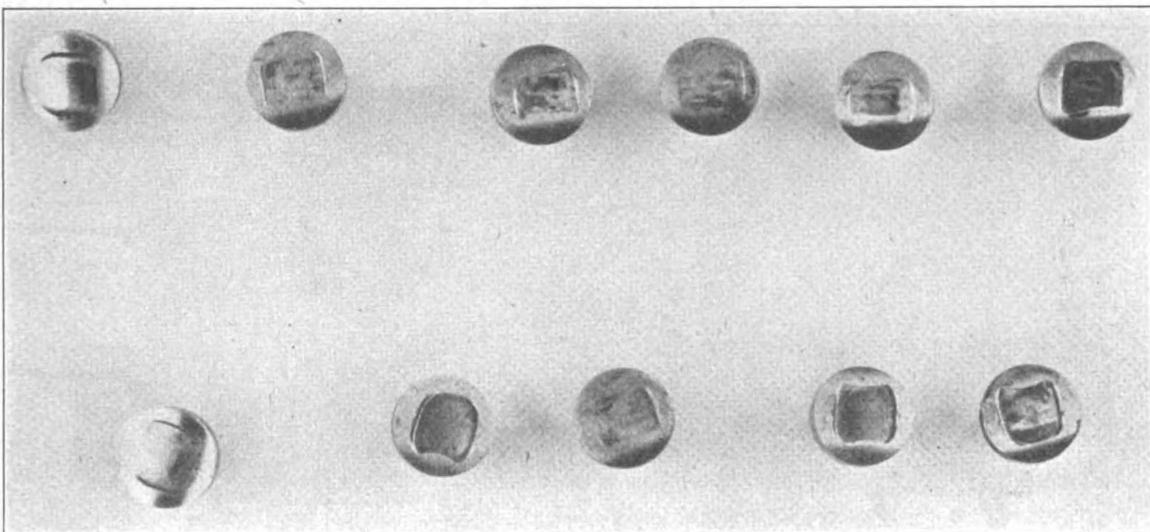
Worn valve tappets. These valve tappets were removed after running 38 hours.
